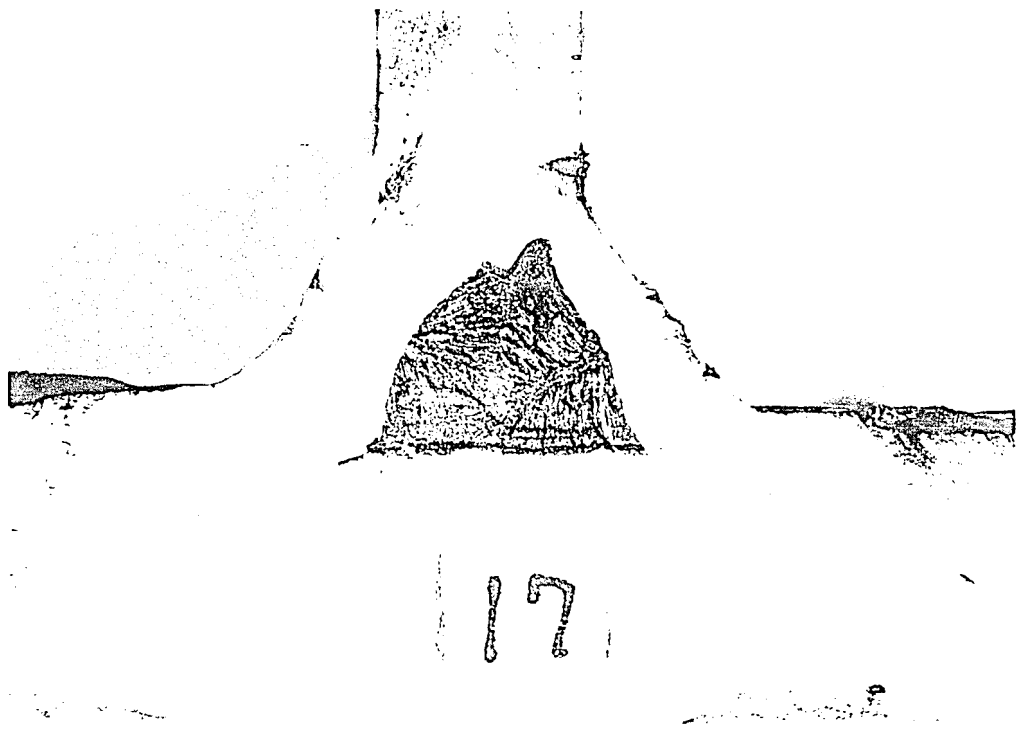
Typical Hydrogen Crack Observed on Fatigue Crack Surface at Intersection of Longitudinal Fillet Welds and Transverse Groove Weld.
